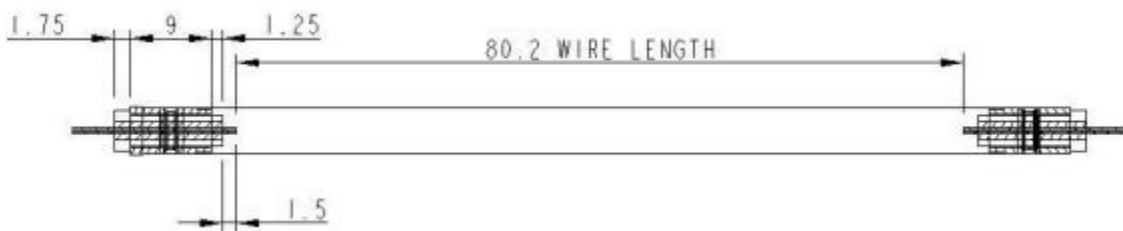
Cross-section of assembled straw with aluminum end-pieces, plastic inserts, and crimp pins. All lengths are in millimeters. (Image courtesy of John Carroll, University of Liverpool).
